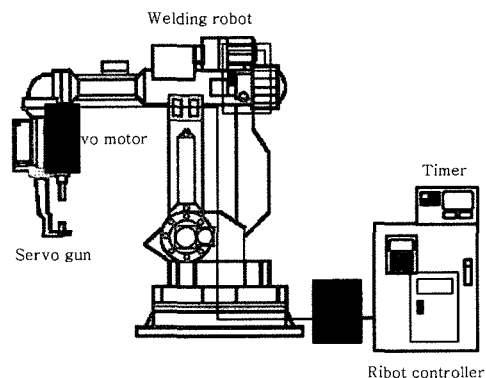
Resistance spot welding robot using servo-gun
